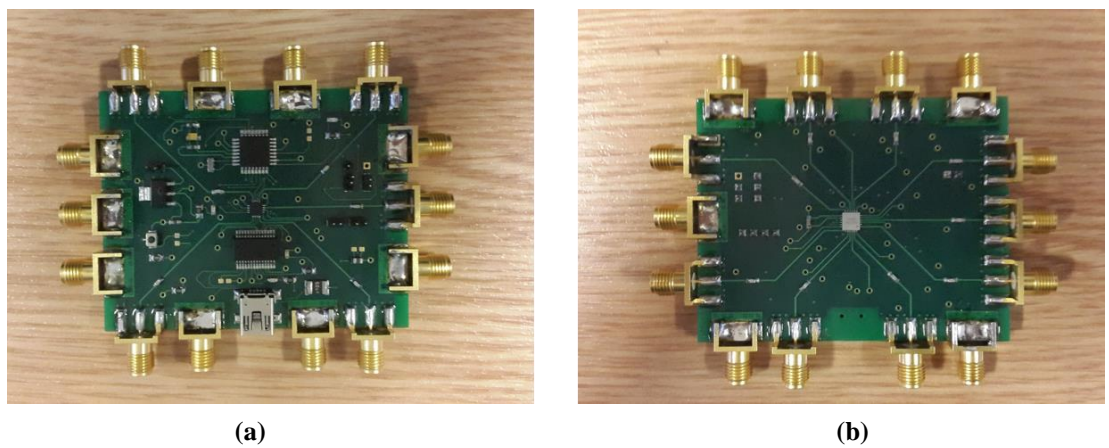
Fabricated PCB design (a) Top view (b) Bottom view
